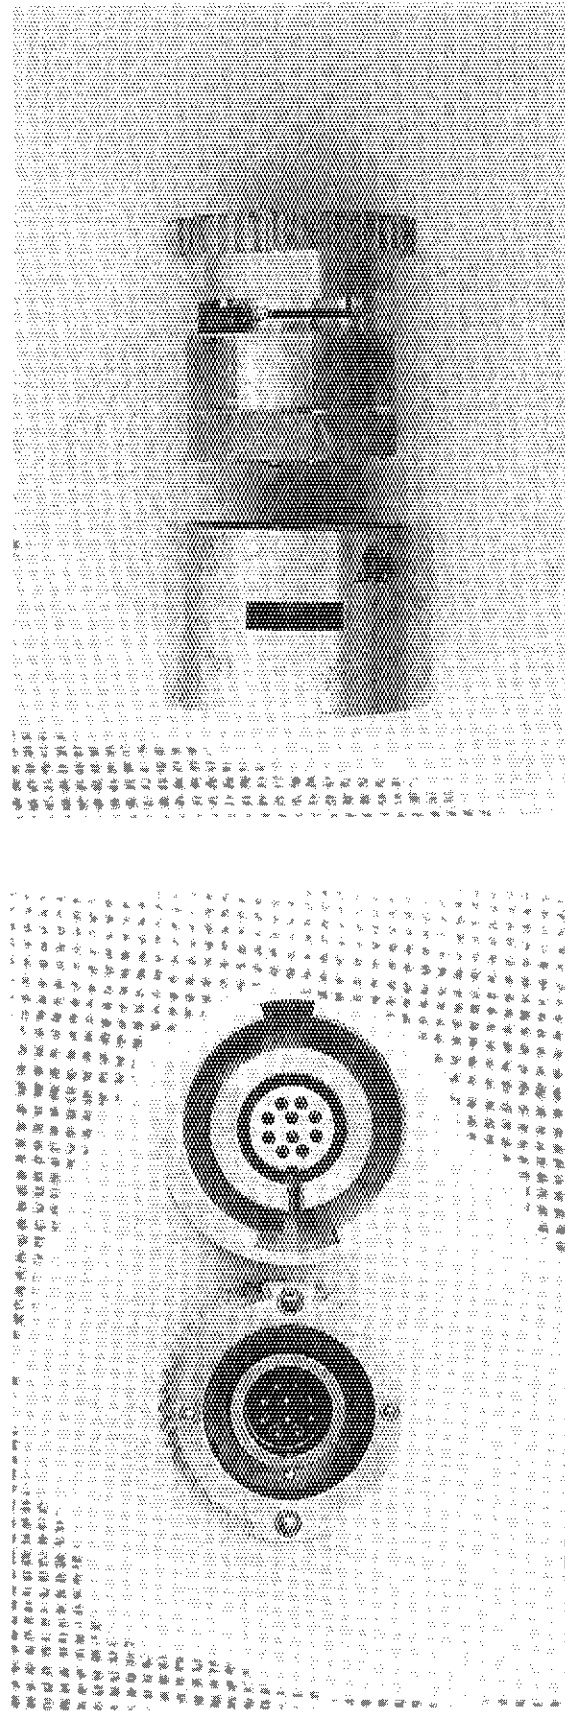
Fabricated receptacle and plug of 2nd step connector
